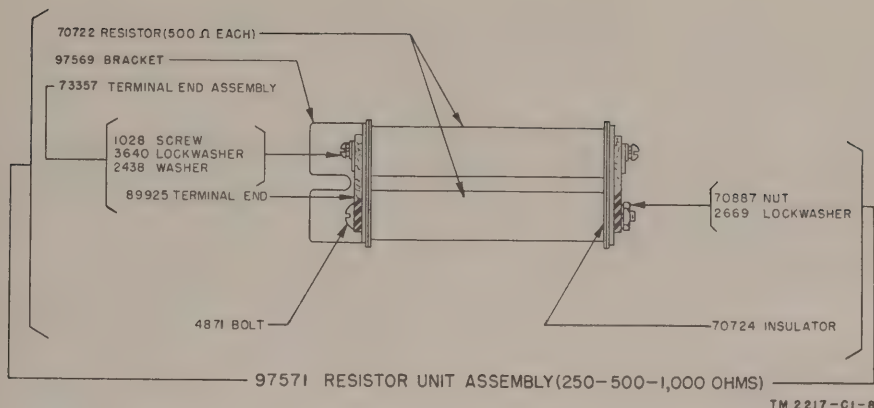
(Added.) Resistor unit assembly for DXD5, location of parts.
